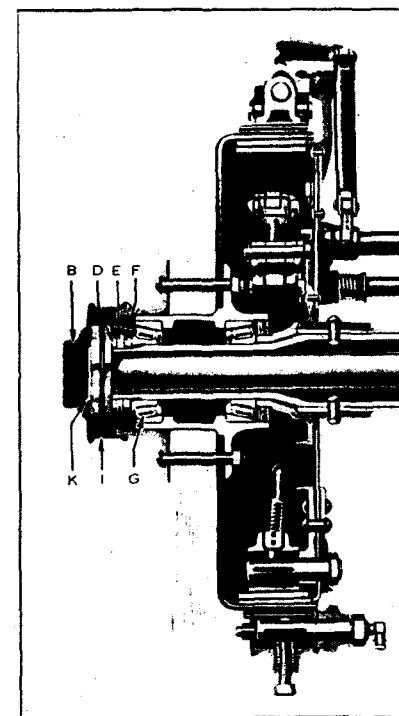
Sectional View of Rear Hub, Showing Bearings.
